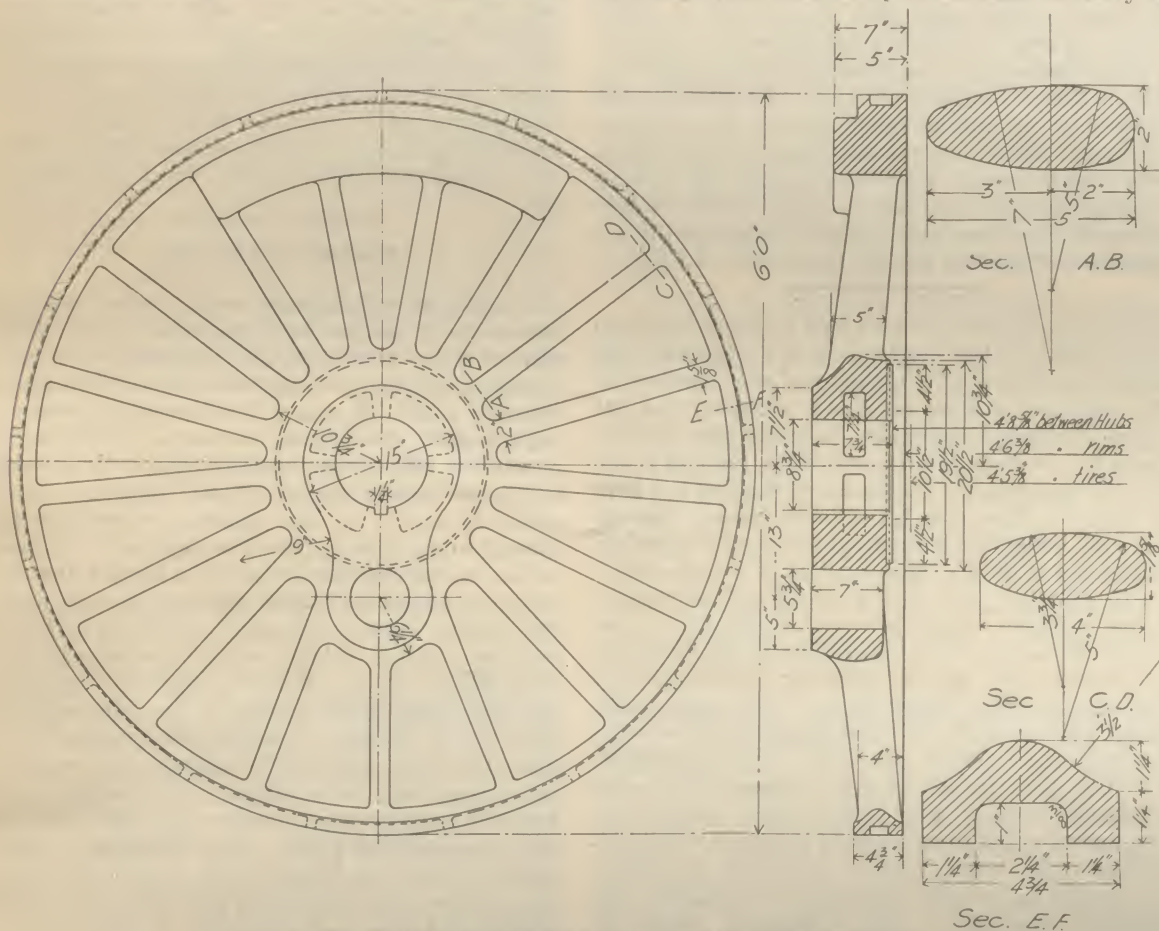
SECTIONS AND ELEVATION OF DRIVING WHEELS.
